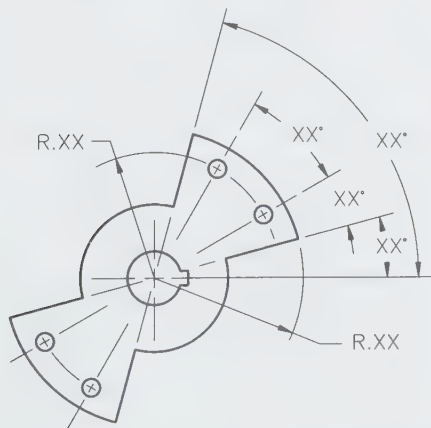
Polar coordinate dimensions combine angular and distance dimensions to define sizes and locations.
